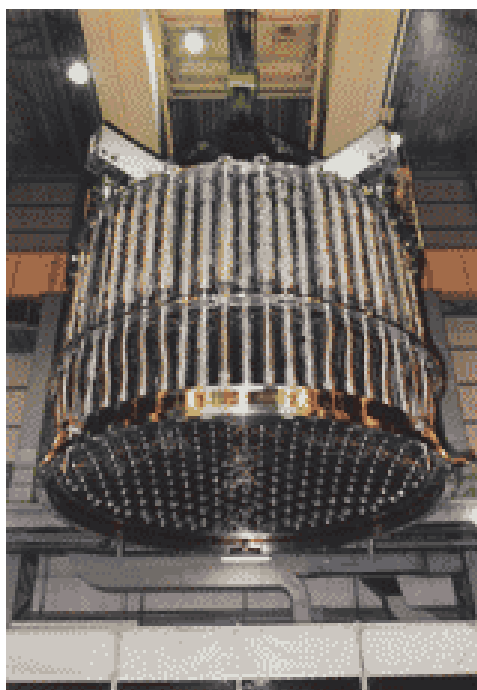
Photo of steam separators installed on shroud head ^[11].
